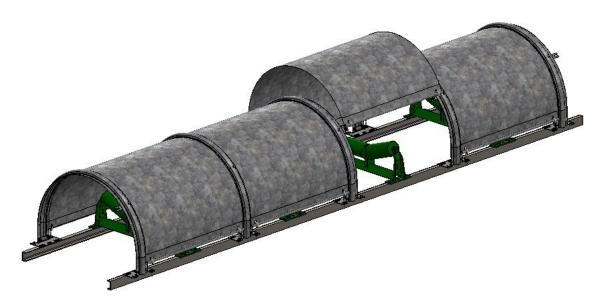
FULL COVERS WITH ONE OPEN SECTION
